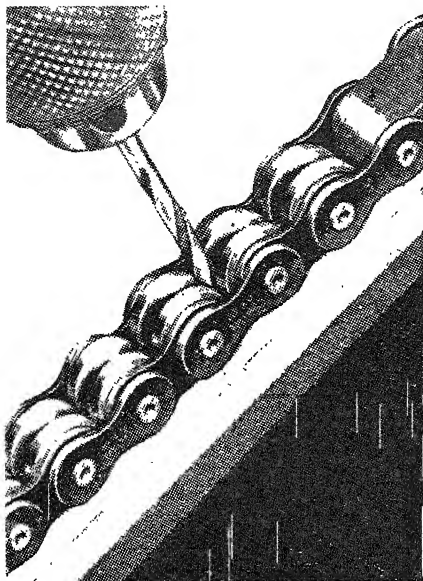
The Reymold jig chain in use as a drilling jig.
